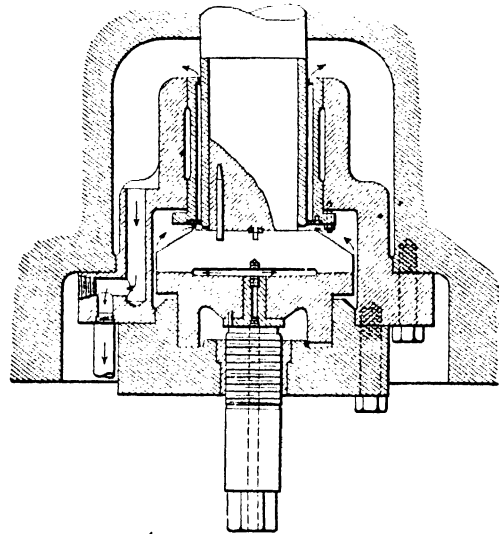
Step bearing of the vertical Curtis steam turbine.
